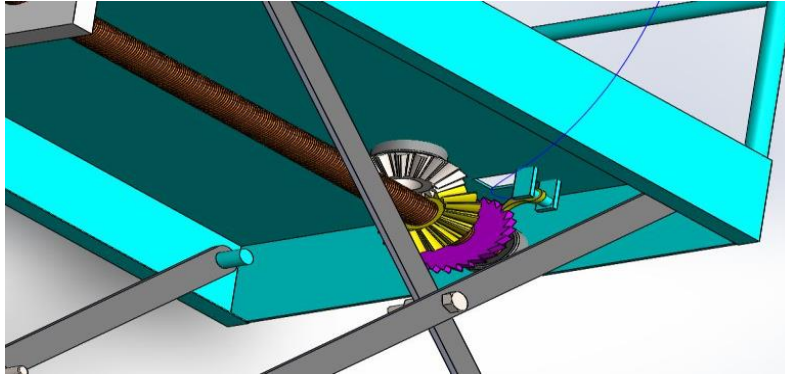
3 Mechanical drive setup in top plate bottom side
